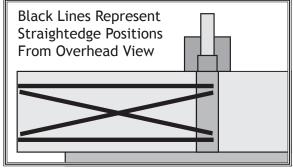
Straightedge positions for verifying if the outfeed table is parallel with cutterhead.
